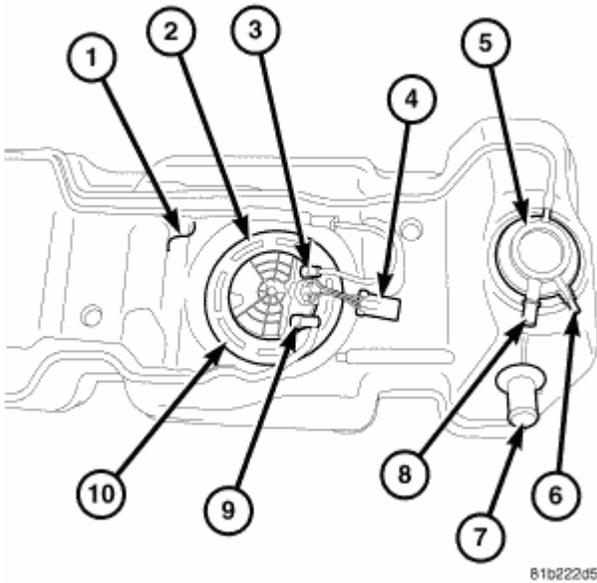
Locating 2.8L Diesel Fuel Pump Module
